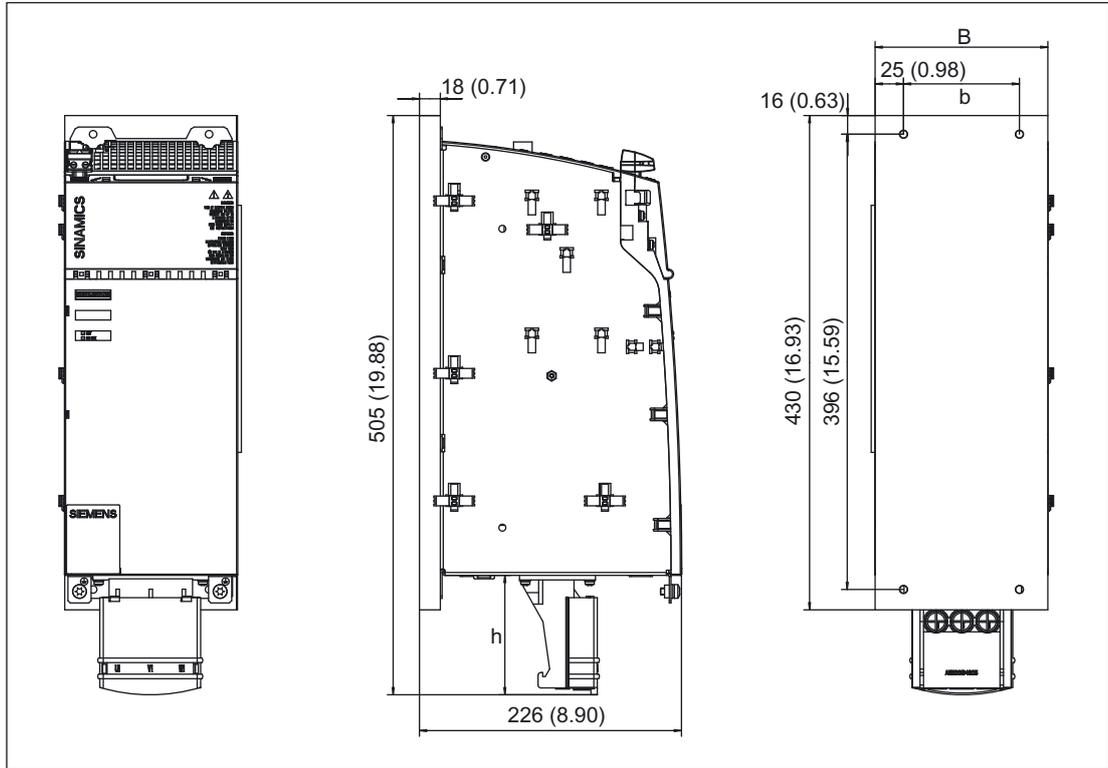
Dimension drawing, Active Line Module with cold plate (36 kW, 55 kW, 80 kW, and 120 kW)
